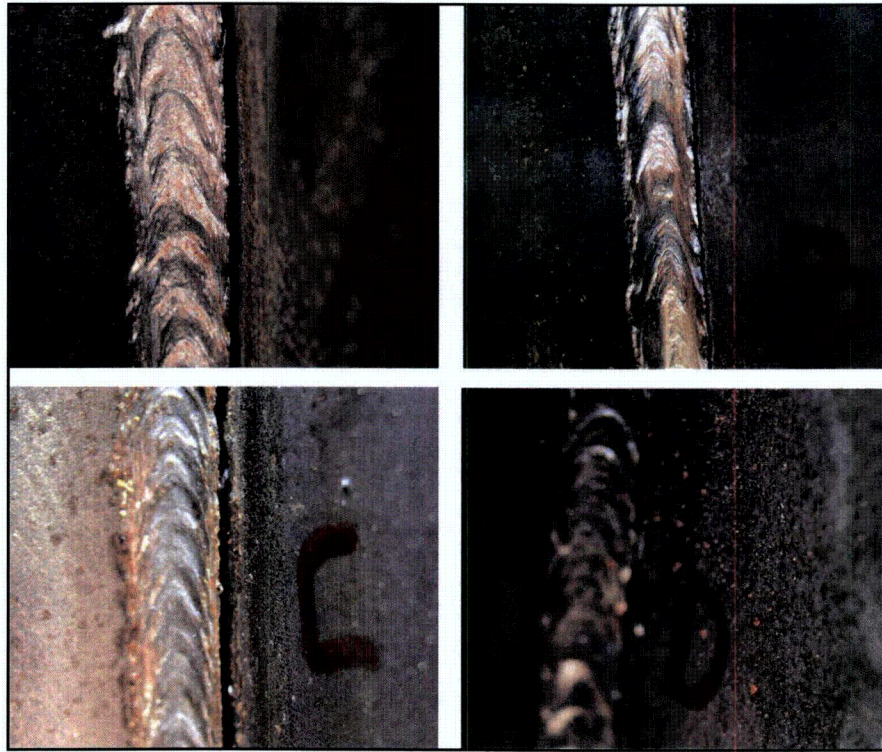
Deflagration Test #2: Post-Test SLB2 Welds
